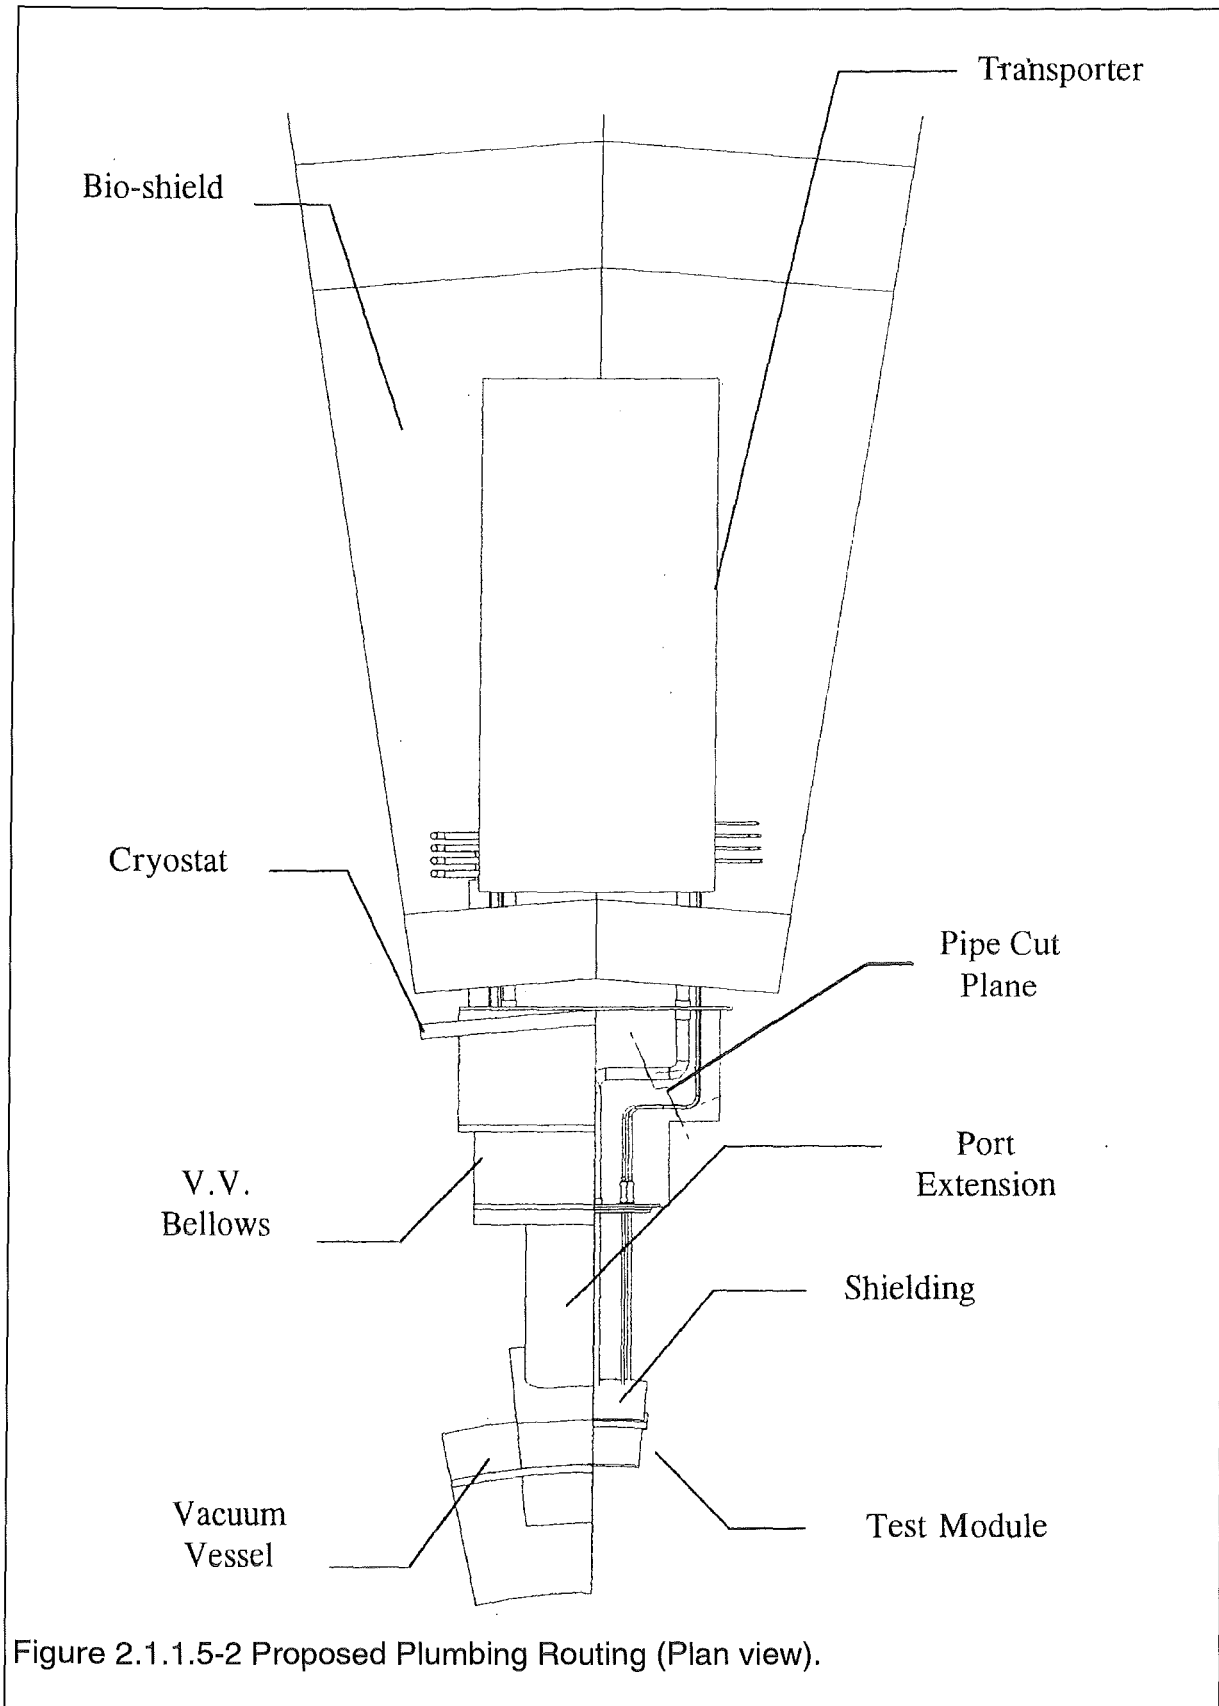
Proposed Plumbing Routing (Plan view).
